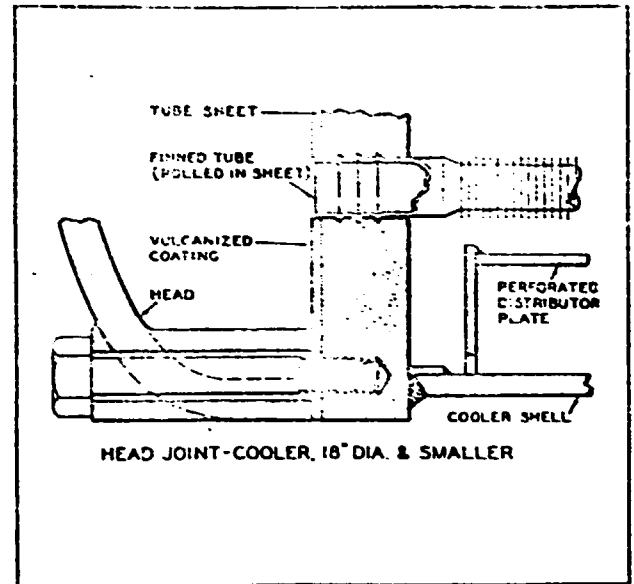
Tube and Tube Sheet Detail - Expanded Tubes
